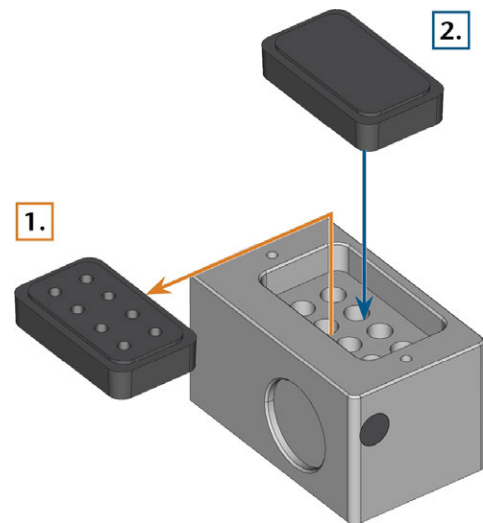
NEW TOOL MAGAZINE INSERT (RIGHT, WITHOUT TOOL POSITIONS) REPLACES OLD INSERT (LEFT, WITH TOOL POSITIONS)
